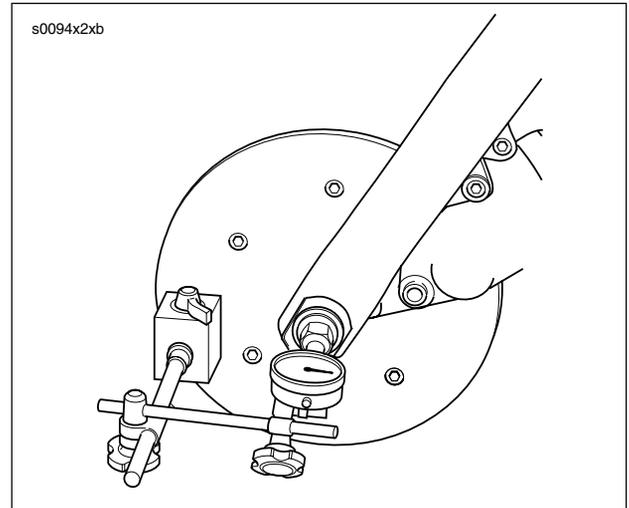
Measuring Lateral End Play (Front Wheel)
